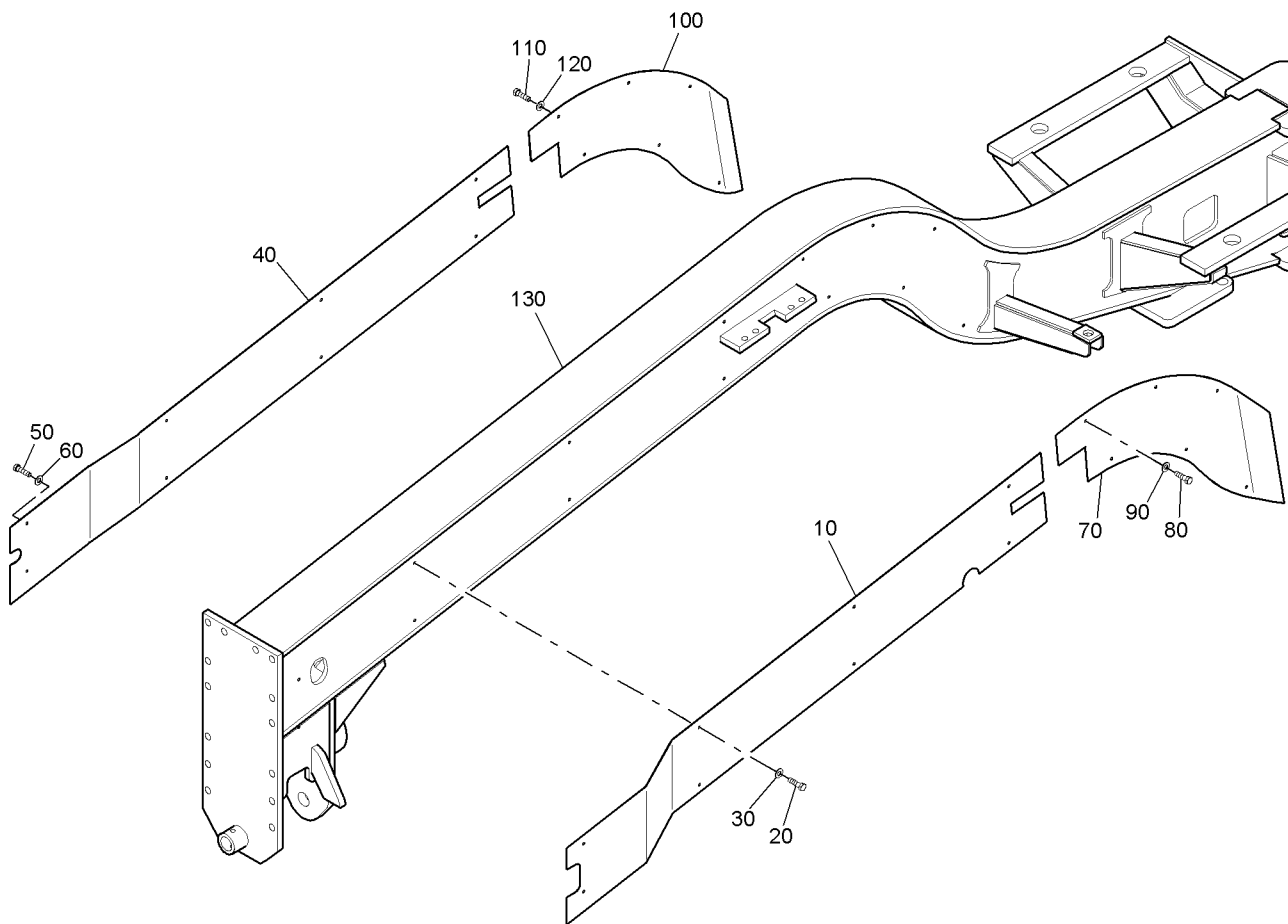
BOOM WELDMENT AND COVER ASSEMBLY
